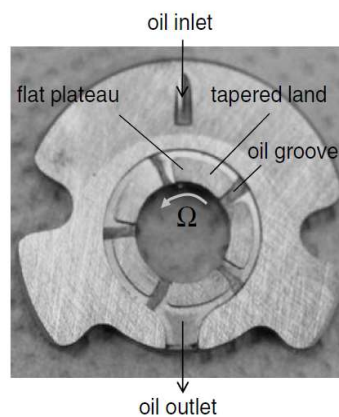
Thrust Bearing (Nguyen-Schäfer, 2012)
